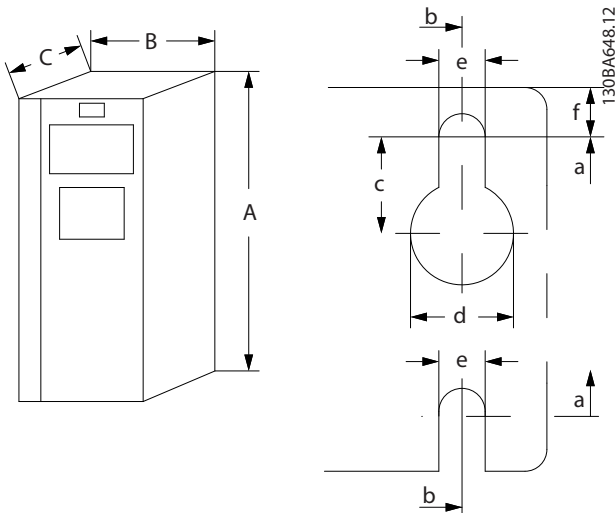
Top and Bottom Mounting Holes (See chapter 9.9 Enclosure Sizes, Power Ratings, and Dimensions)
